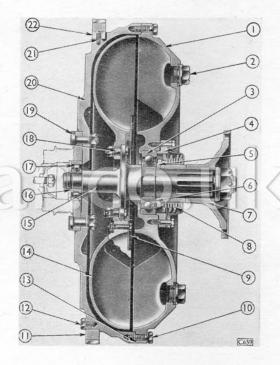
Section through fluid coupling and bellows gland oil seal.
